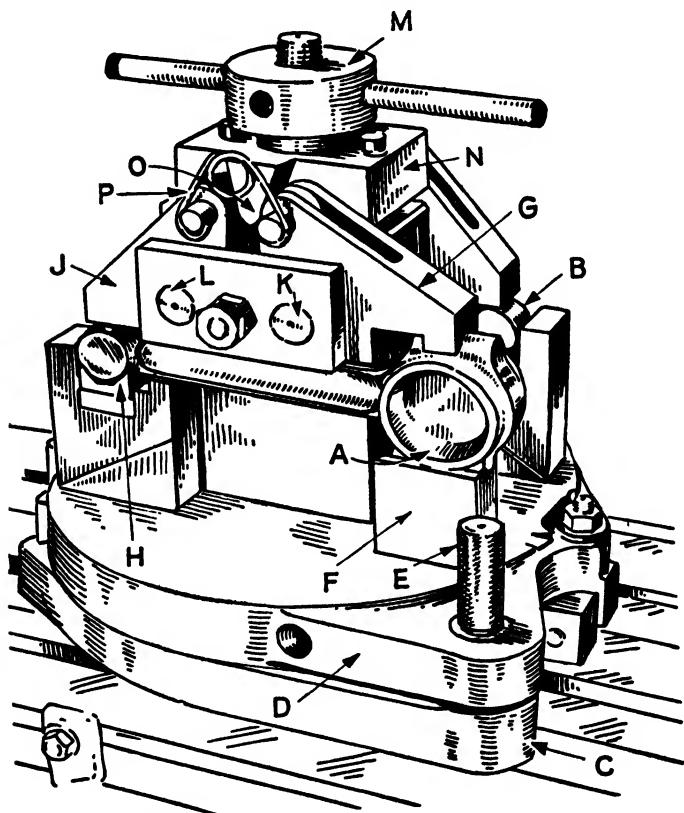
Equalizing clamp for two connecting rods in reverse position.
